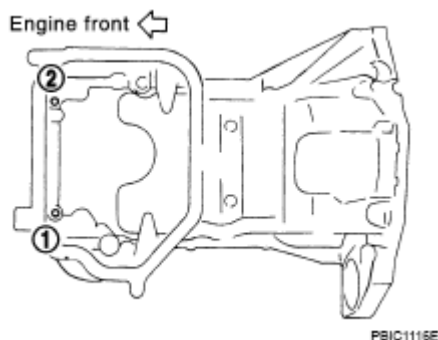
Identifying Two Mounting Bolts In Front Of Oil Pan (Upper)
